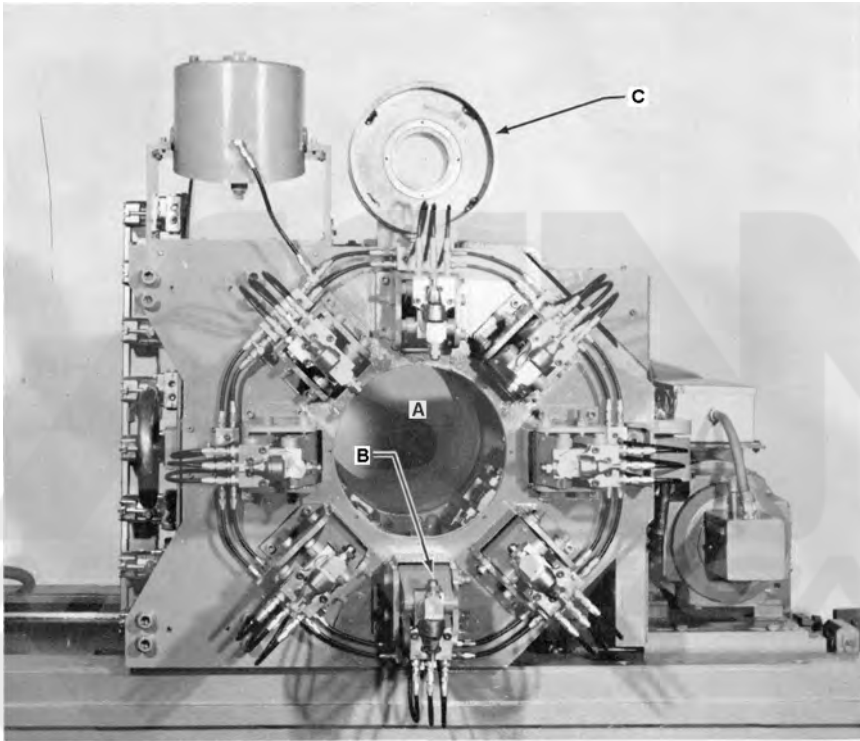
Test head of the eddy current inspection unit shown in Fig. 5; A, orifice for test pipe or tube; B, one of eight paint spray guns for marking; C, reference standard test piece. Source: Ref 1
